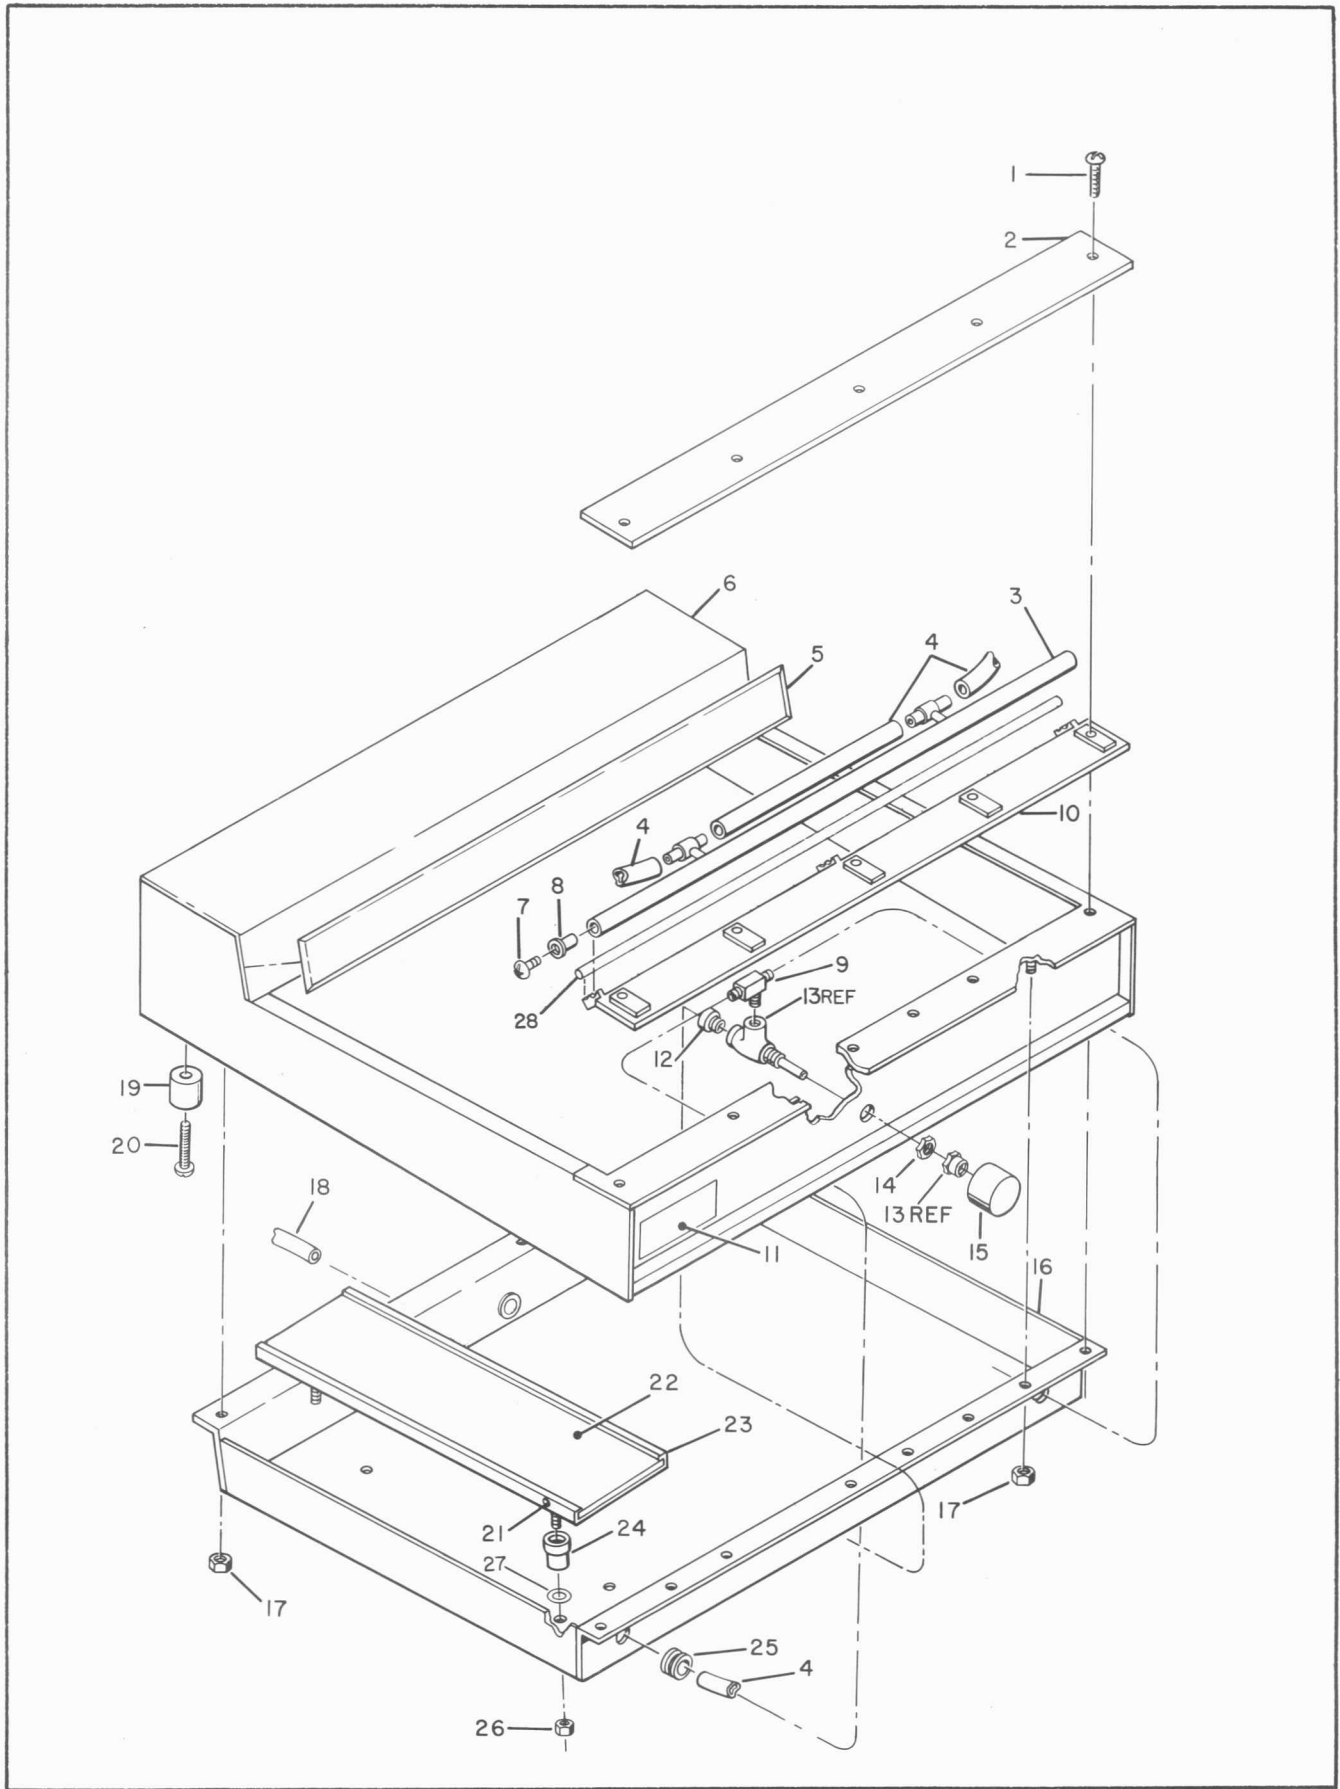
HANDIMET® I ASSEMBLY DETAIL
